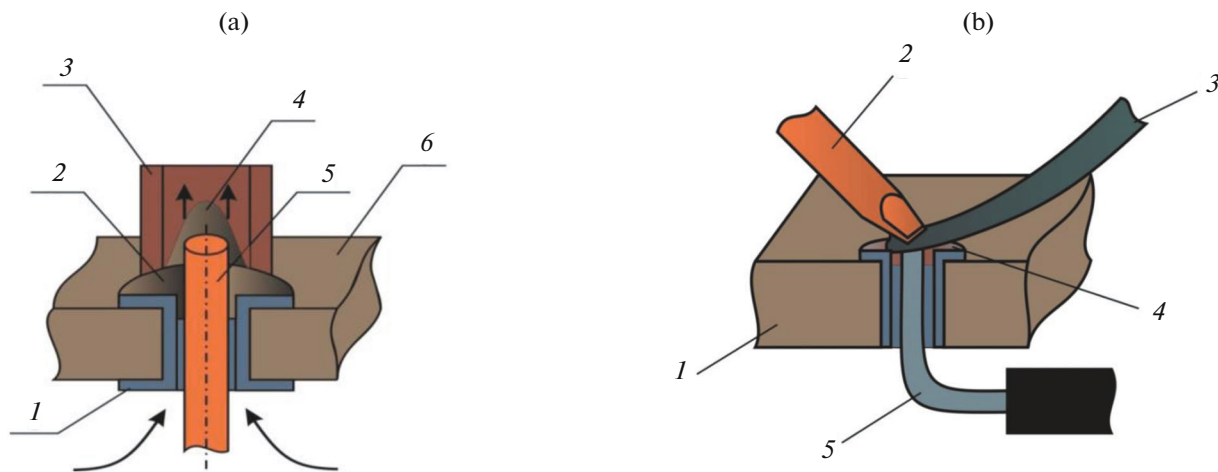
Removal of solder (a) by vacuum desoldering: (1) metalized hole, (2) solder, (3) soldering iron tip, (4) solder suction, (5) component lead, and (6) printed circuit board and (b) by a desoldering wick: (1) printed circuit board, (2) soldering iron tip, (3) wick, (4) contact pad, and (5) component lead.
